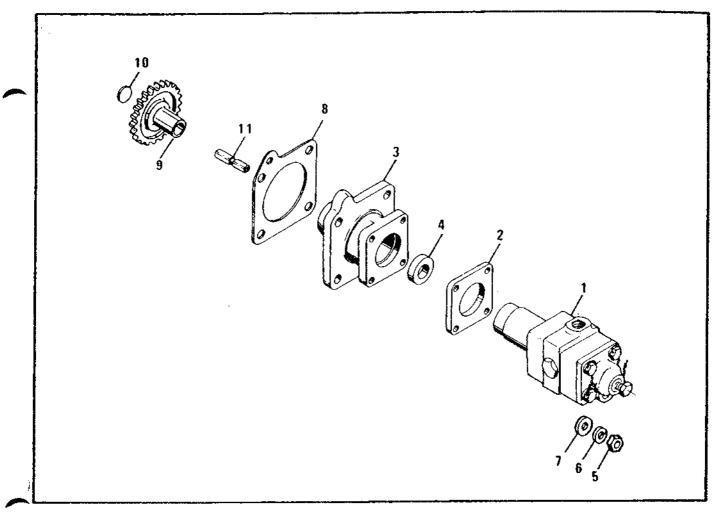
FUEL PUMP ASSEMBLY (NEW STYLE)
